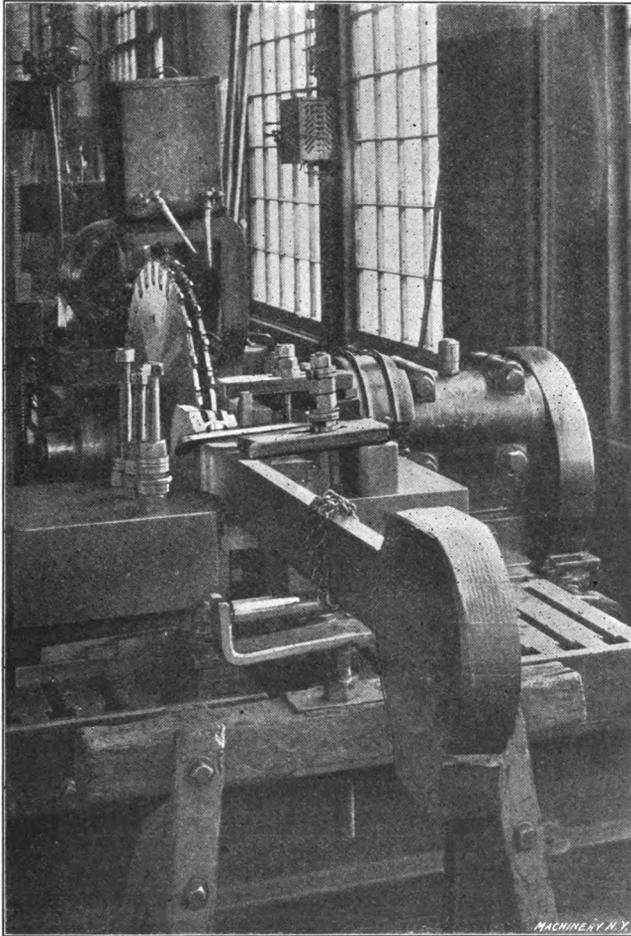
Cutting out the Knuckle-joint Slot in the End Rod
